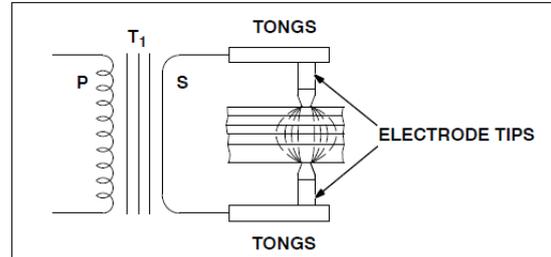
Resistance Spot Weld Heat Zones
